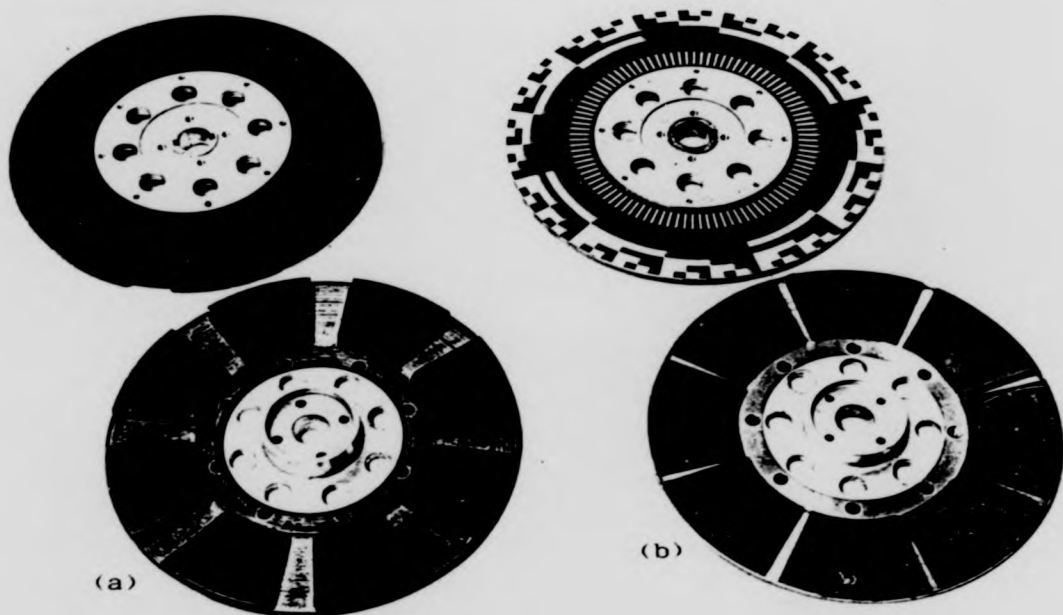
Rotor assemblies of (a) Motor 1, and (b) Motors 2 and 3
